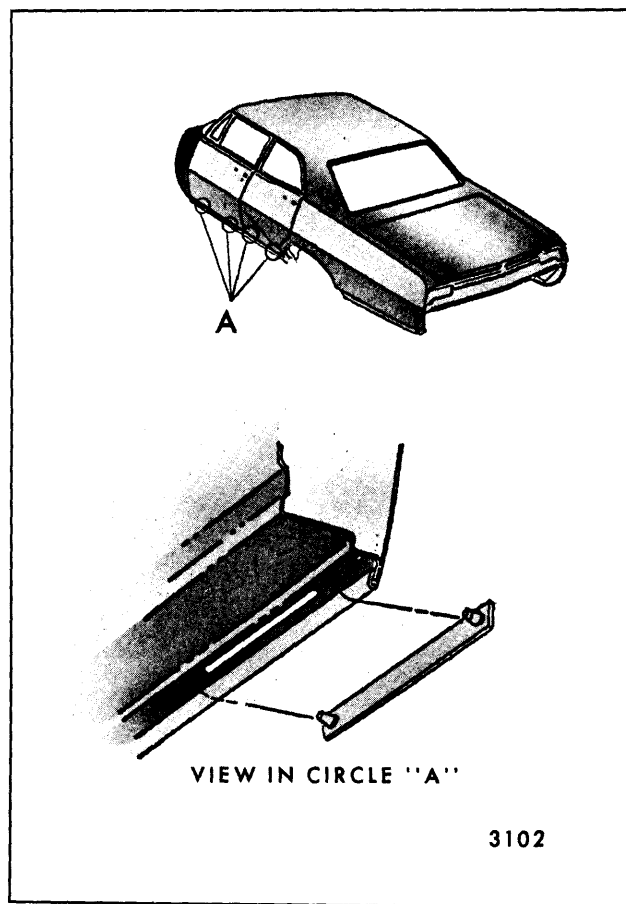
Door Bottom Drain Hole Sealing Strips
